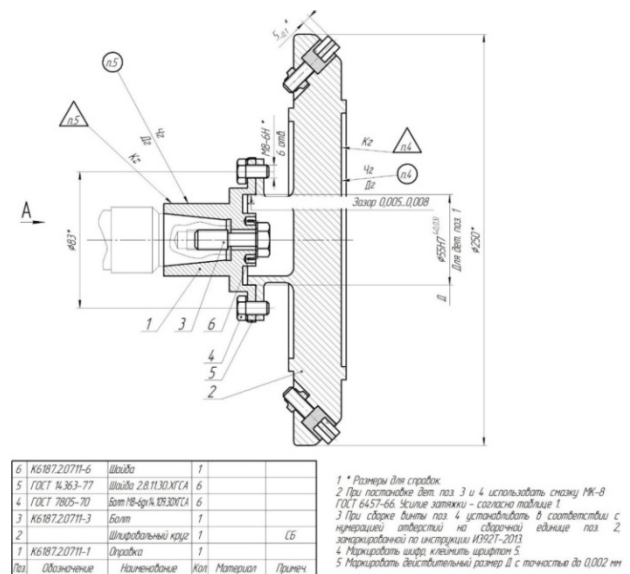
Grinding wheel for ultra-fast grinding with 45 degree grinding angles
